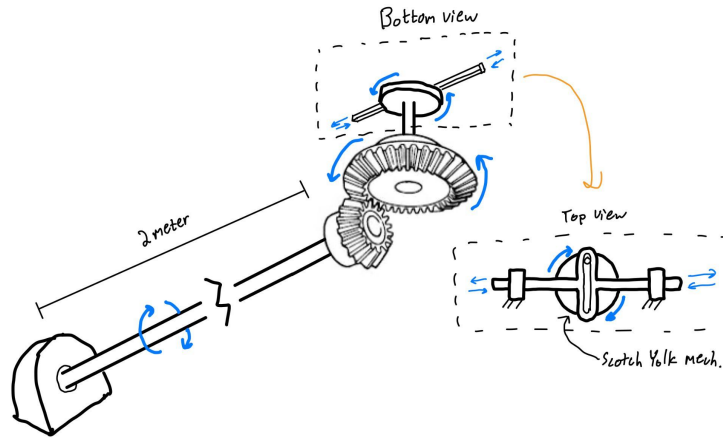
Scotch Yoke Design, including 2 bevel gears and a drive shaft
